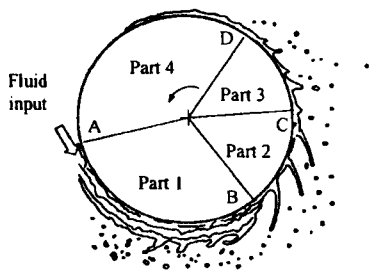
Rotary atomization process of cutting fluid around the workpiece in turning
